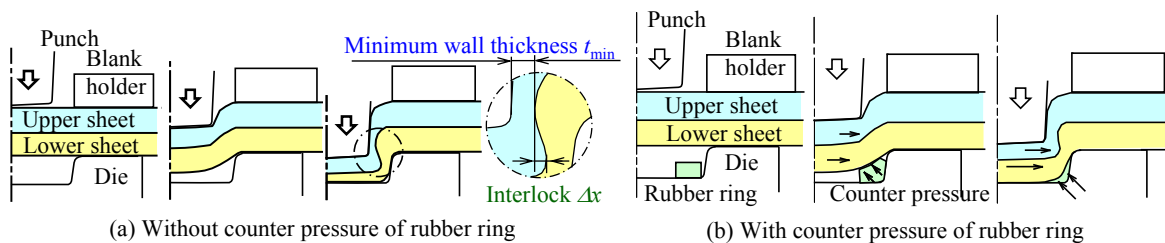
Mechanical clinching (a) without counter pressure of rubber ring and (b) with counter pressure of rubber ring.
